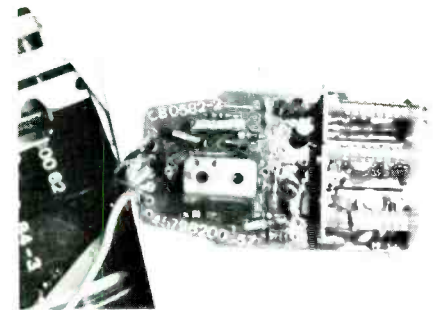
The FM tuner subassembly of a Blaupunkt "Emden III" export model receiver. This subassembly is slightly larger than that in Fig. 4 because the 1st FM IF transformer is mounted on it.
